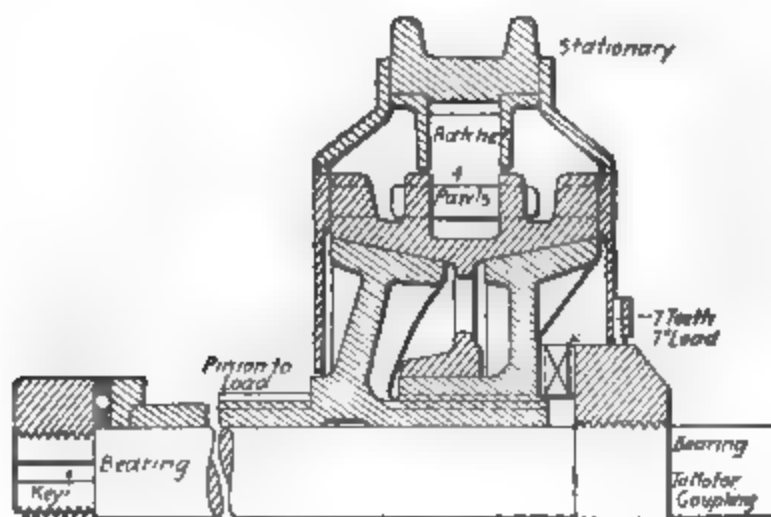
Cone Brake "Naval" Boat Crane Full Load Torque = 7880 In-Lbs.
